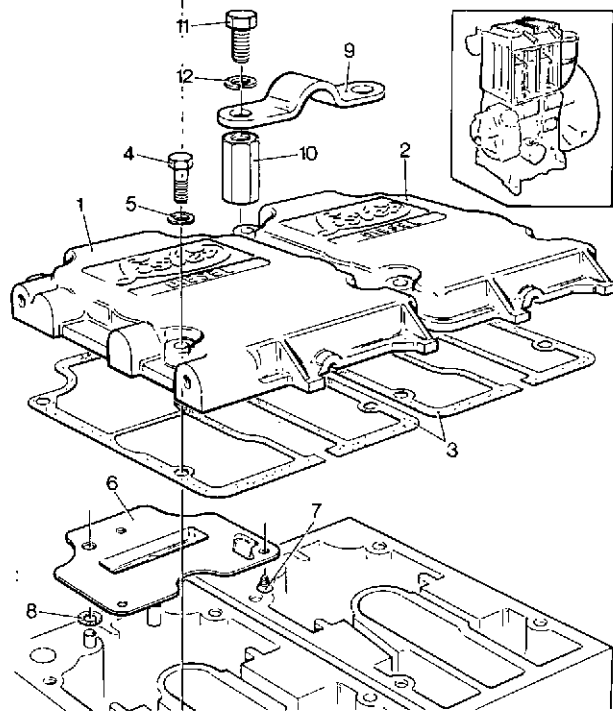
Cylinder Head Cover &amp; Lifting Plate
